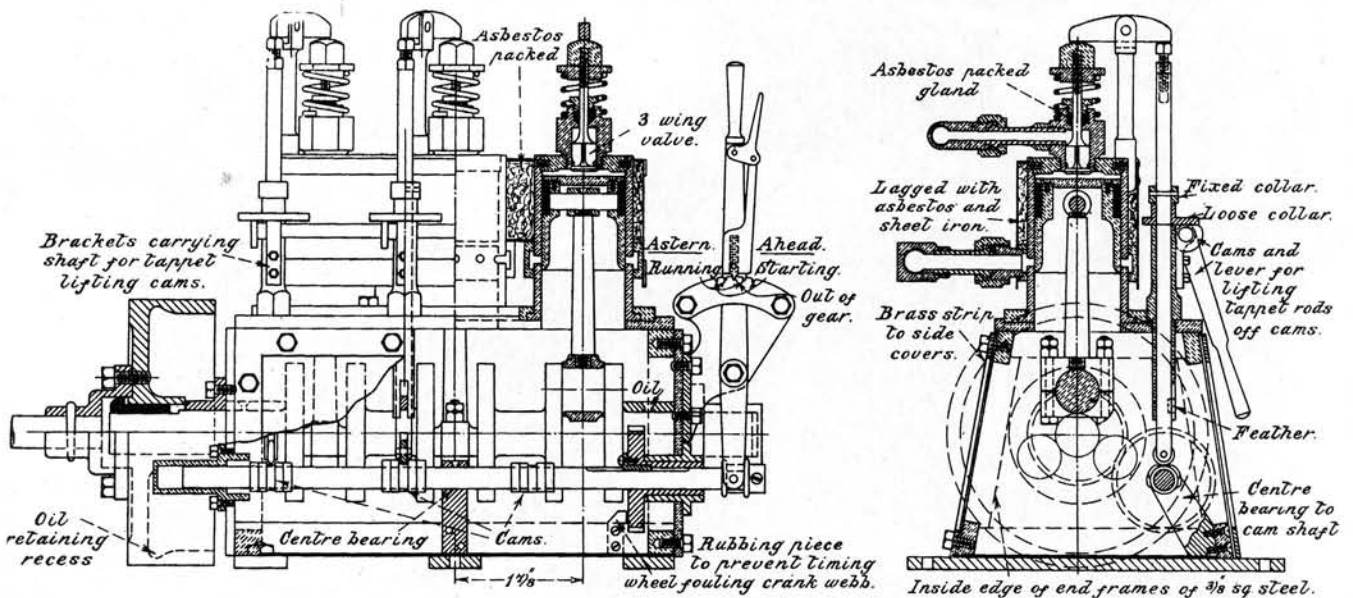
and 3.—Part Sectional Side and End Elevation of 3-cylinder Single-Acting Uniflow Reversing Launch Engine.
